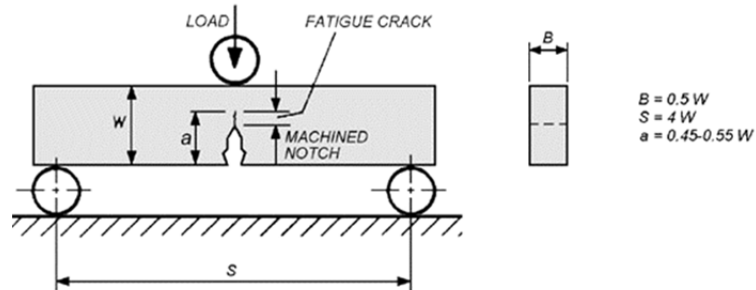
ASTM Standard Single Edge notched Bend (SENB) Specimen
